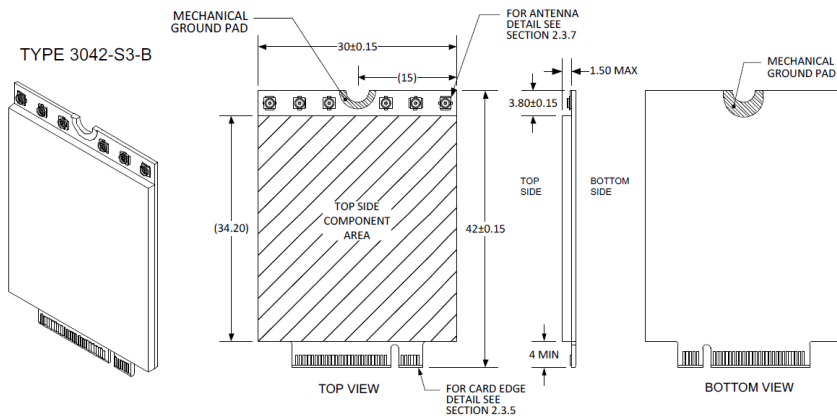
Standard Dimensions of M.2 Type 3042-S3 (Unit: mm)
